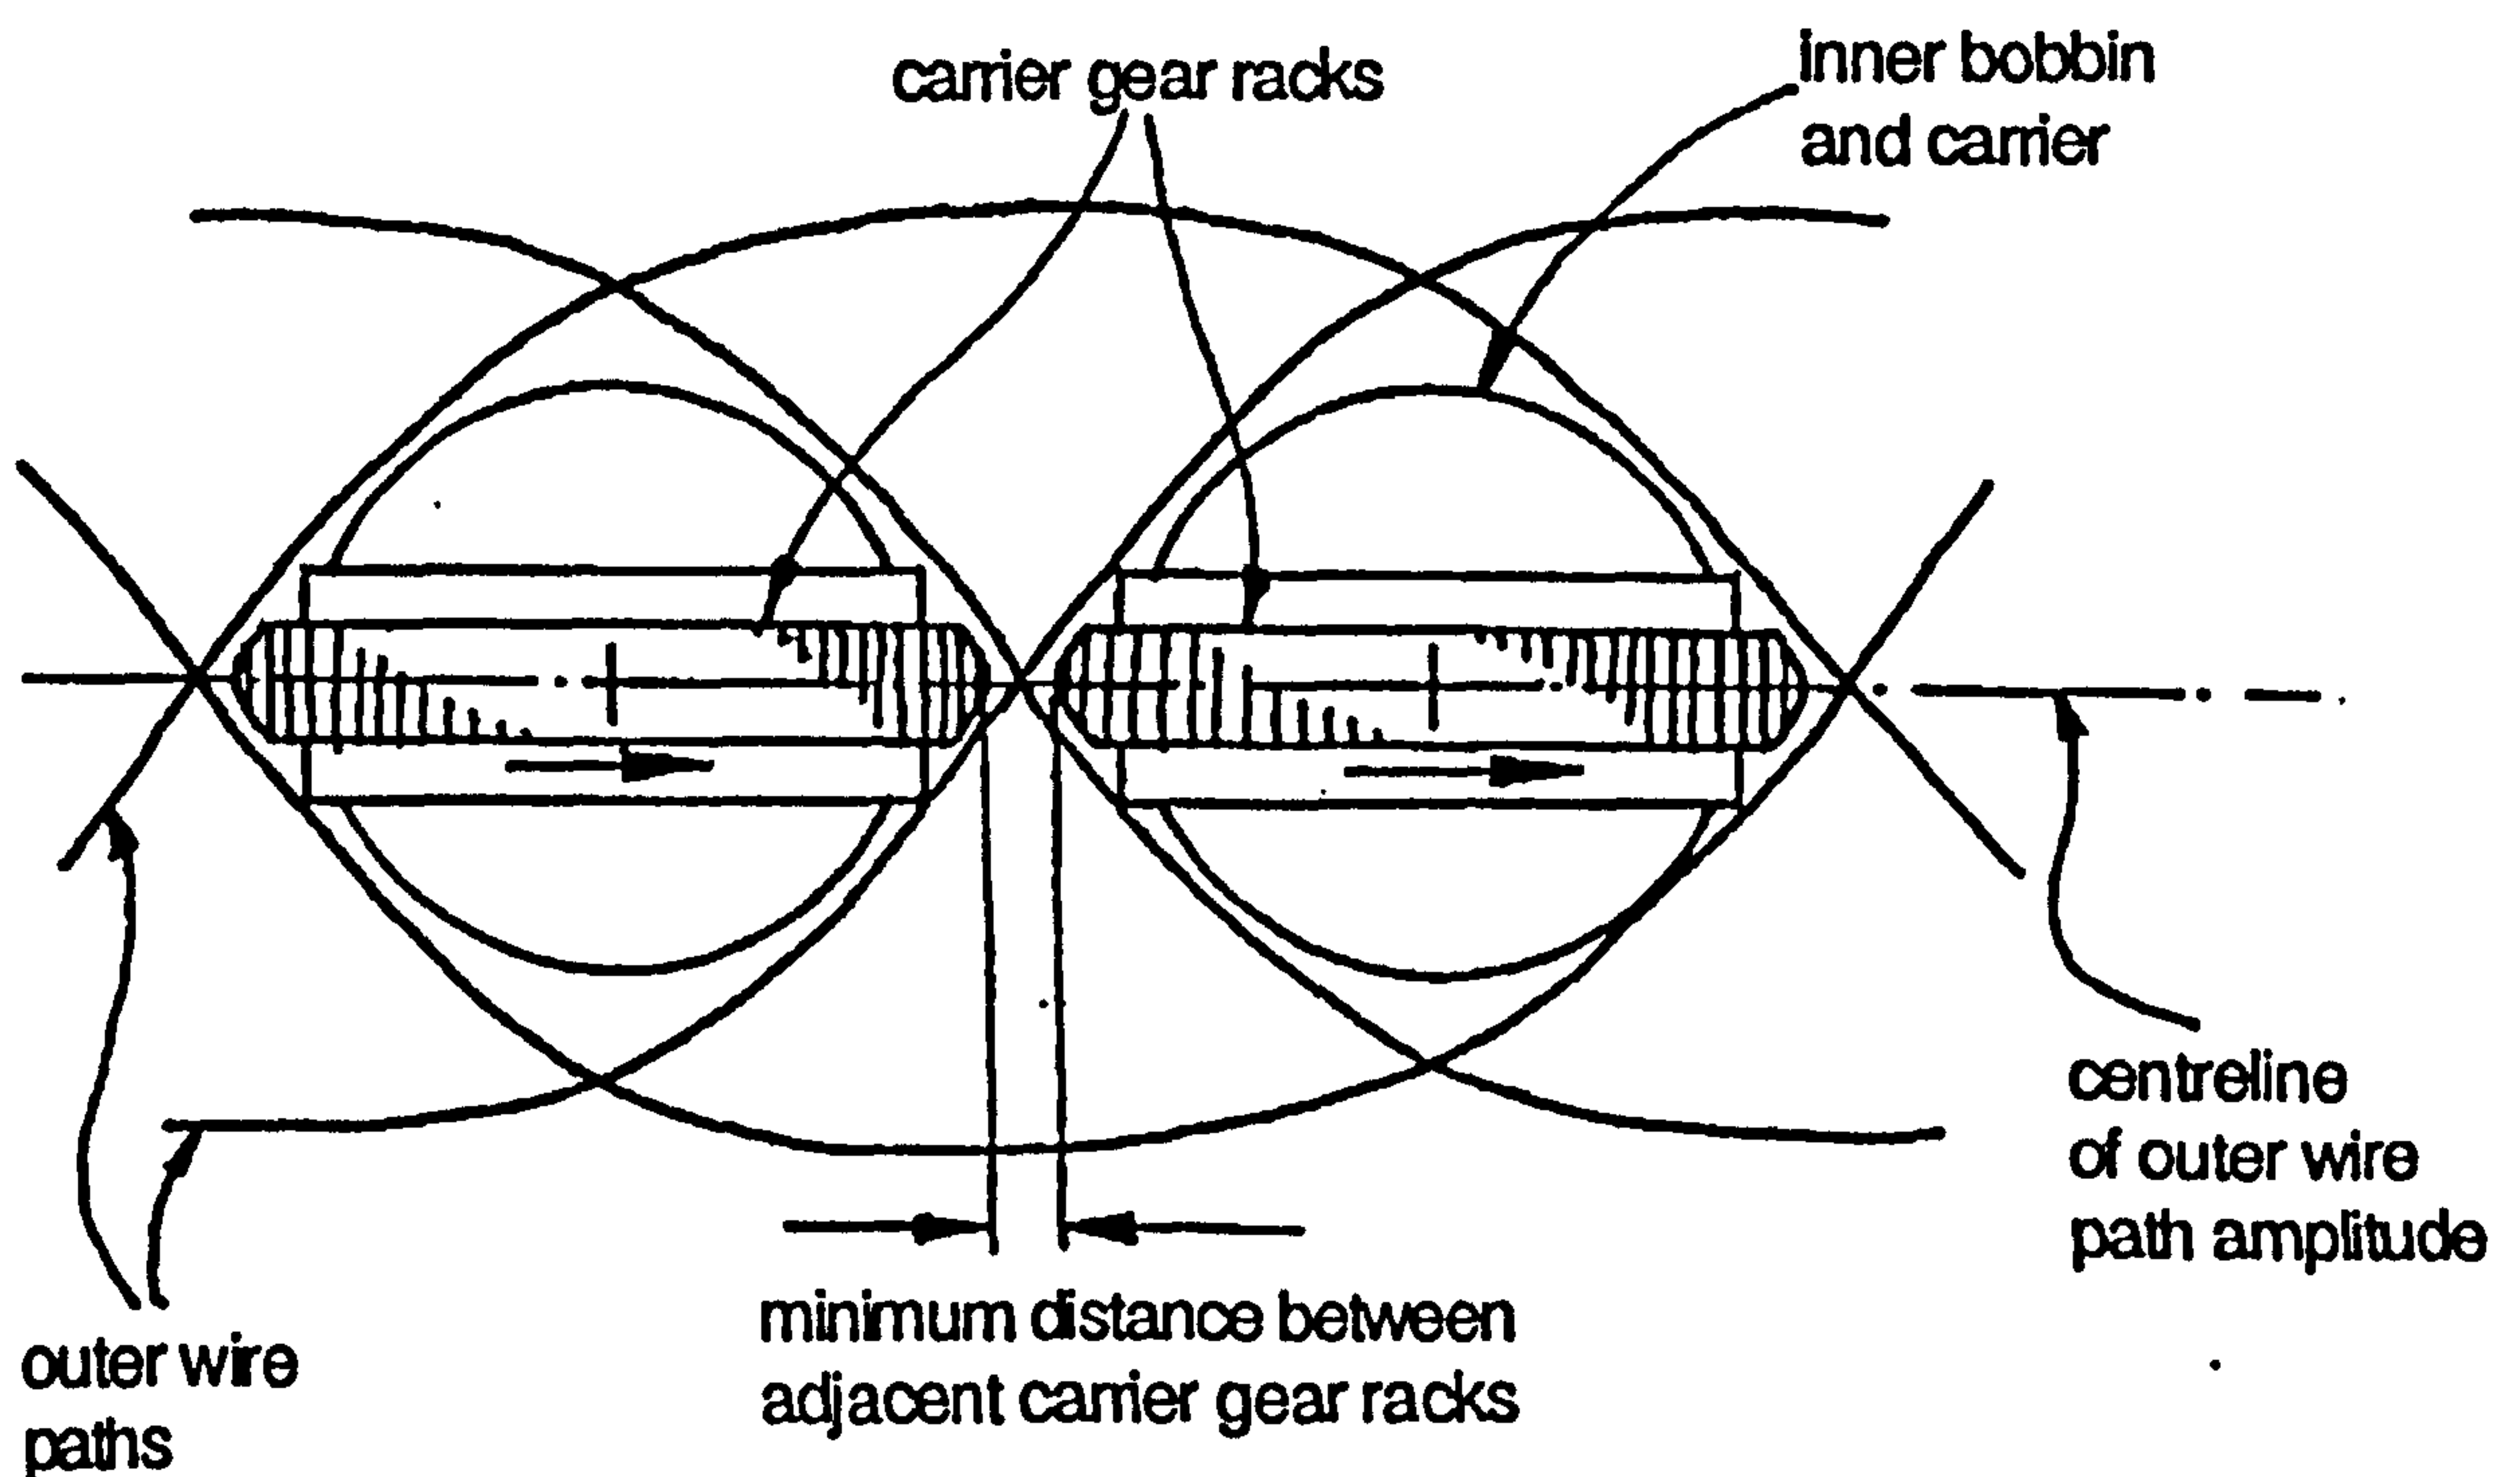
Ideal location of inner carrier drive gear rack
